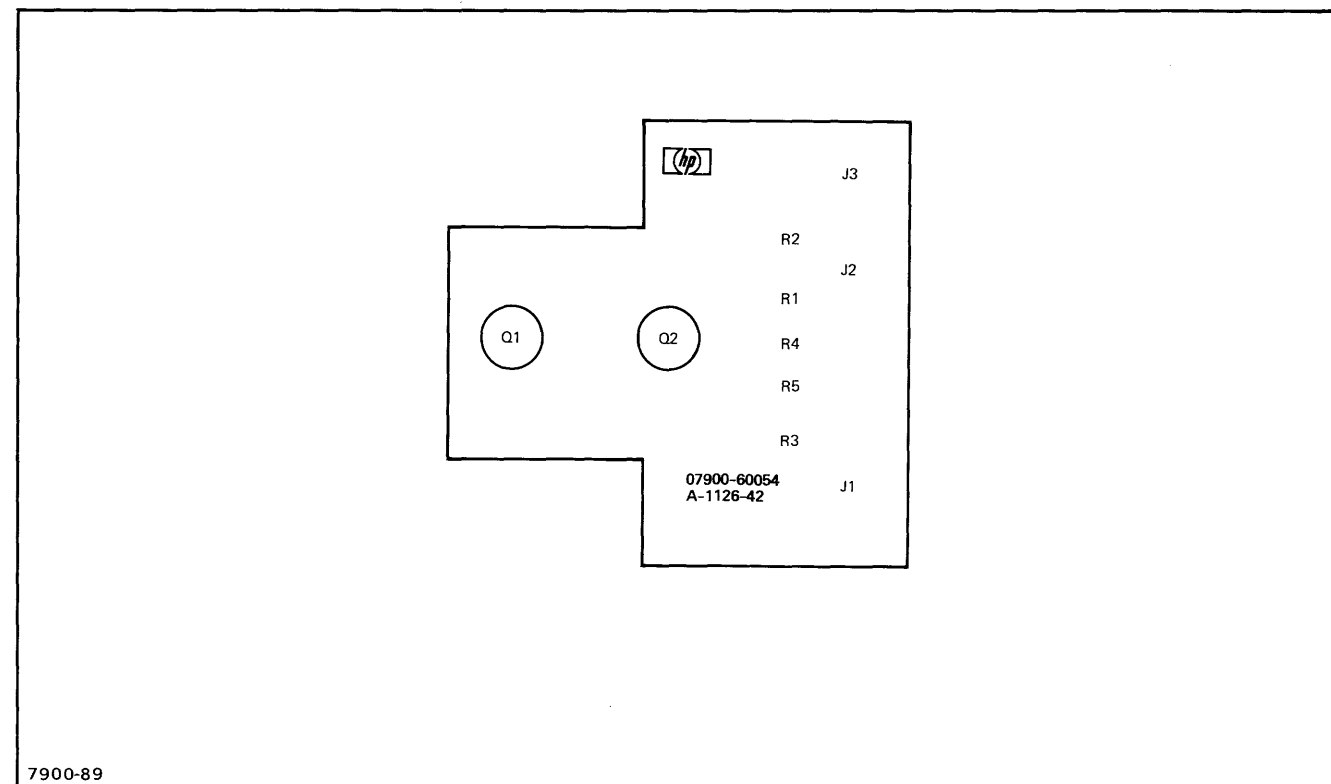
Sector Transducer PC Assembly A2, Parts Location Diagram
